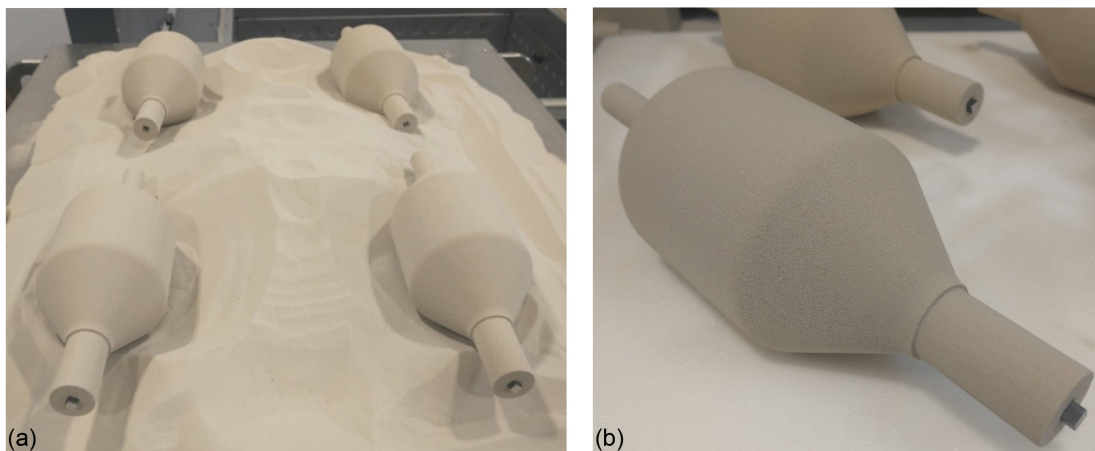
Additively manufactured high-temperature washout mandrels from Origen Manufacturing; manufactured using porous media (air and ceramic). (a) Still in powder bed after being additively manufactured. (b) Close-up side view.
